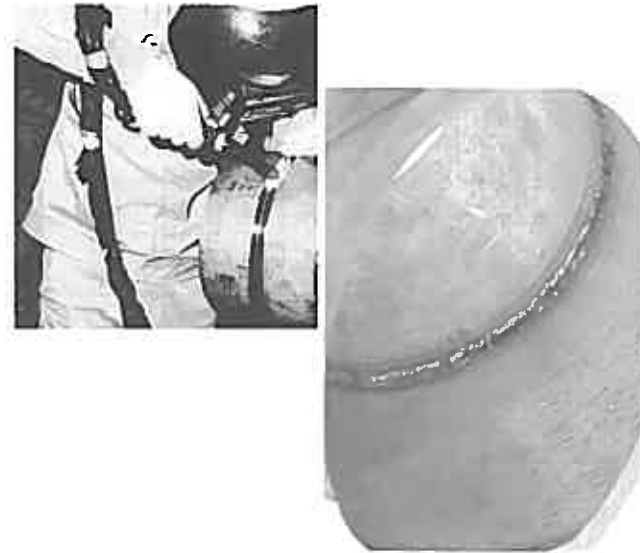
The reverse side of the root pass weld (right) made with a TGX-308L filler rod on a Type 304 pipe joint without back shielding.
